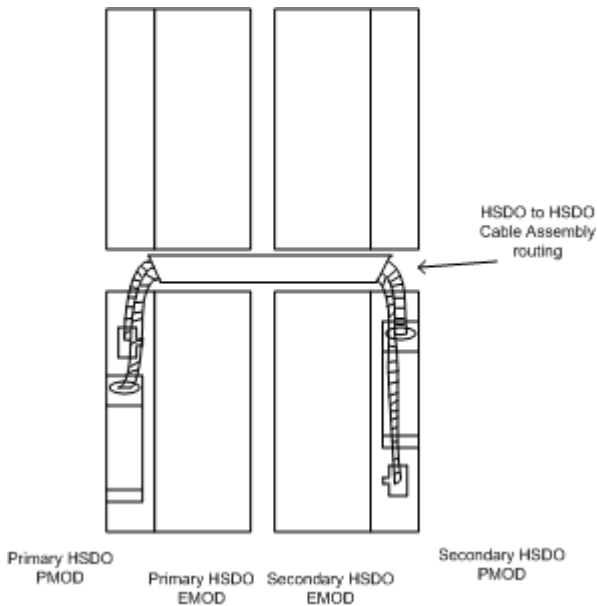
HSDO to HSDO Cable Assembly Routing - Redundant Configuration
